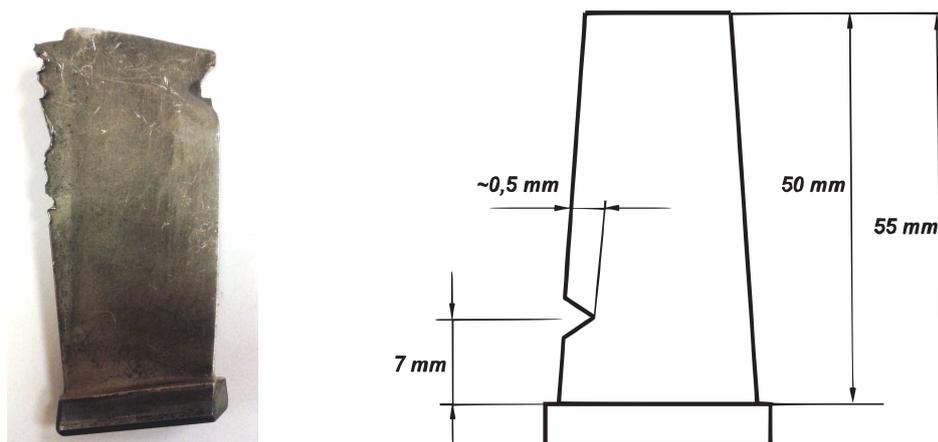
View of blade damaged by foreign object (a), dimension of the investigated blade with v-notch (b).
